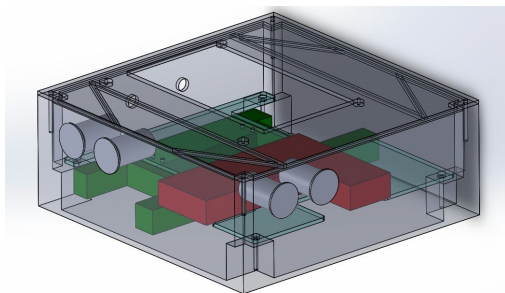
CAD-Drawing of future demonstrator. All electronics and the sensor unit is placed inside a 3d-printed enclosure. The unit is controlled via touchscreen which is located in the lid.
